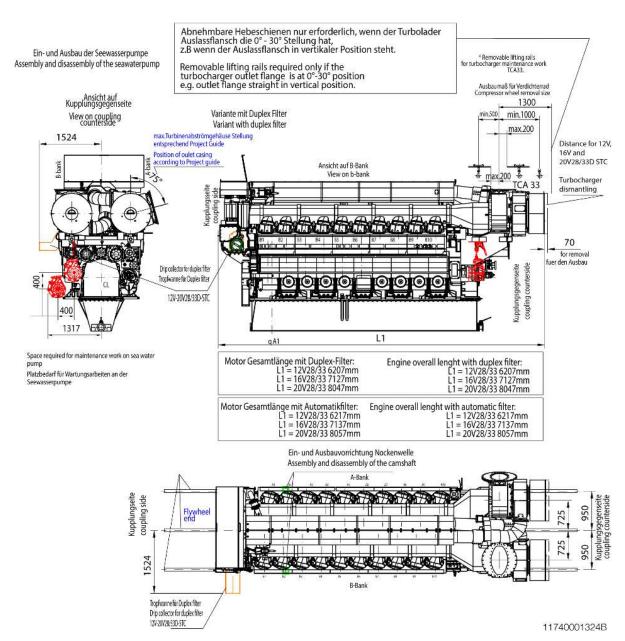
Removal dimensions of lube oil duplex filter, lube oil automatic filter, centrifuge, turbocharger, compressor wheel and seawater pump
